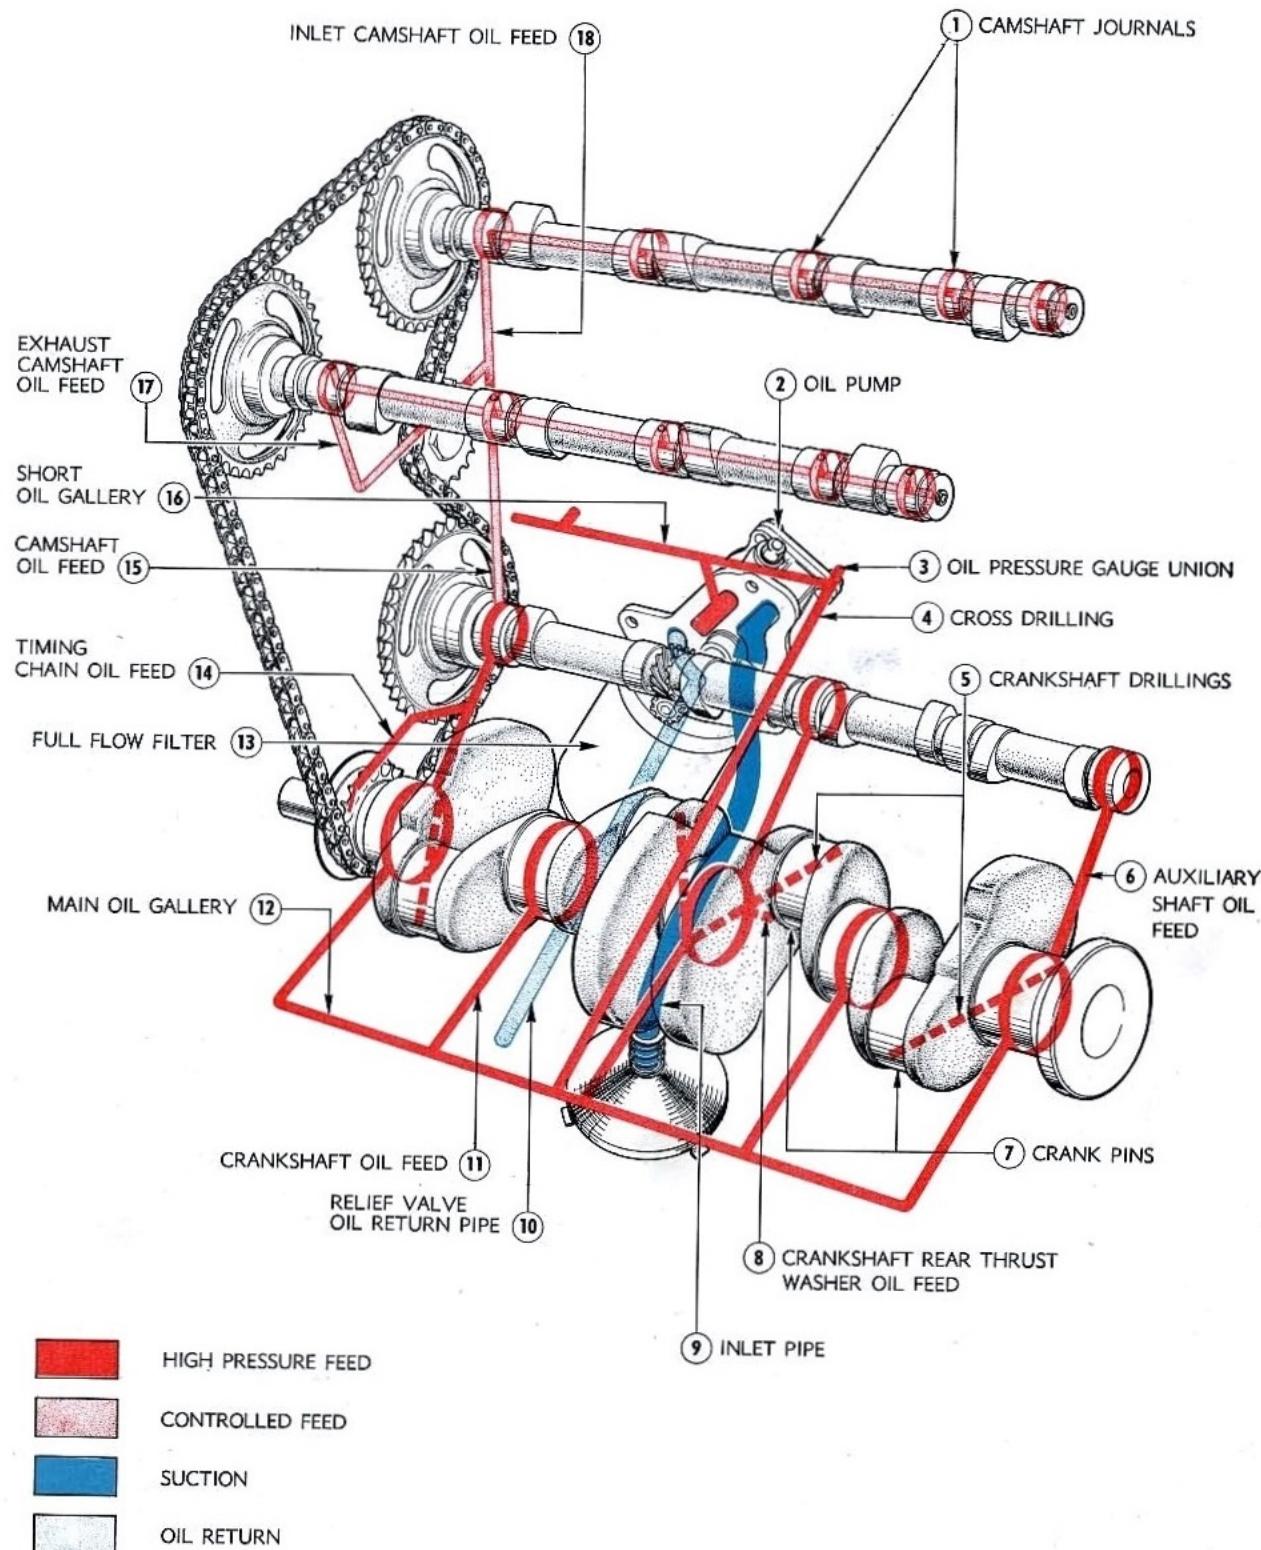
THE ENGINE LUBRICATION SYSTEM
